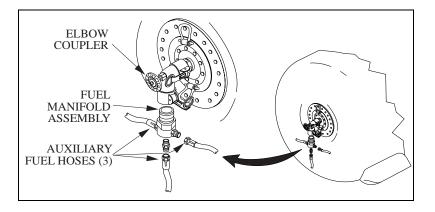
Fuel manifold assembly with three auxiliary hoses
